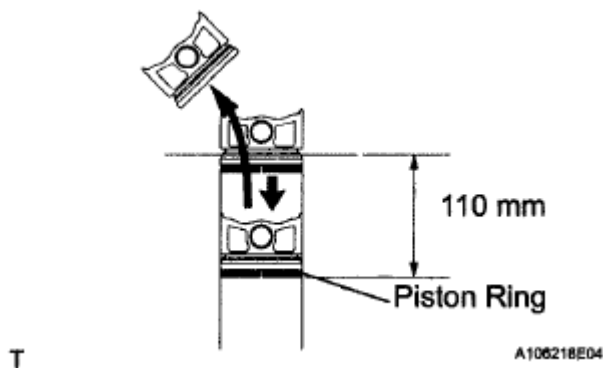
Pushing Piston Ring Bottom Of Ring Travel
